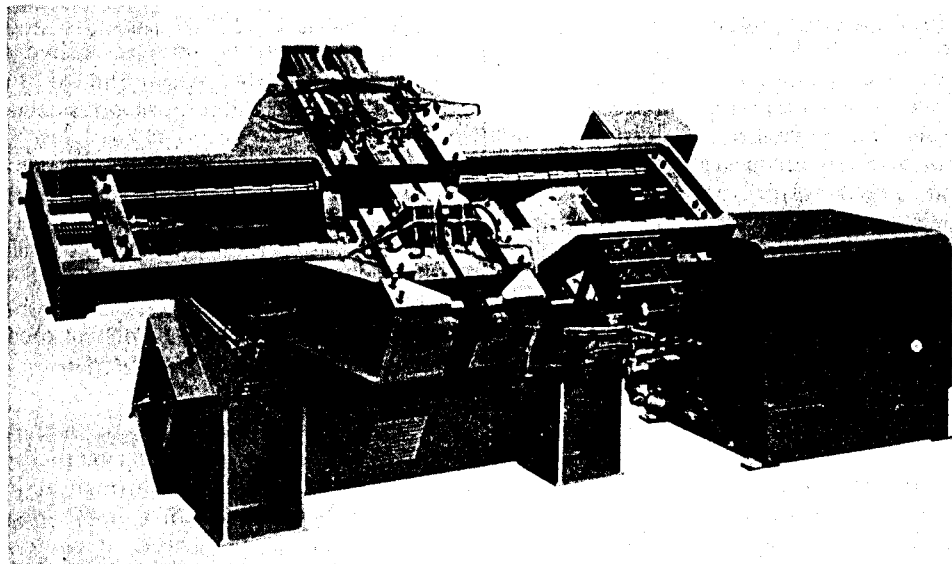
Automatic Hydraulically Operated Flash Welding Machine with Horizontal Clamping
